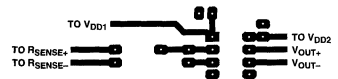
Bottom Layer of Printed Circuit Board Layout.
